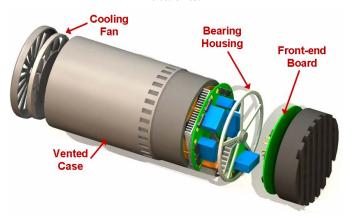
Exploded view of one possible IMMD assembly showing frontend interface board, bearing housing, and cooling fan.
